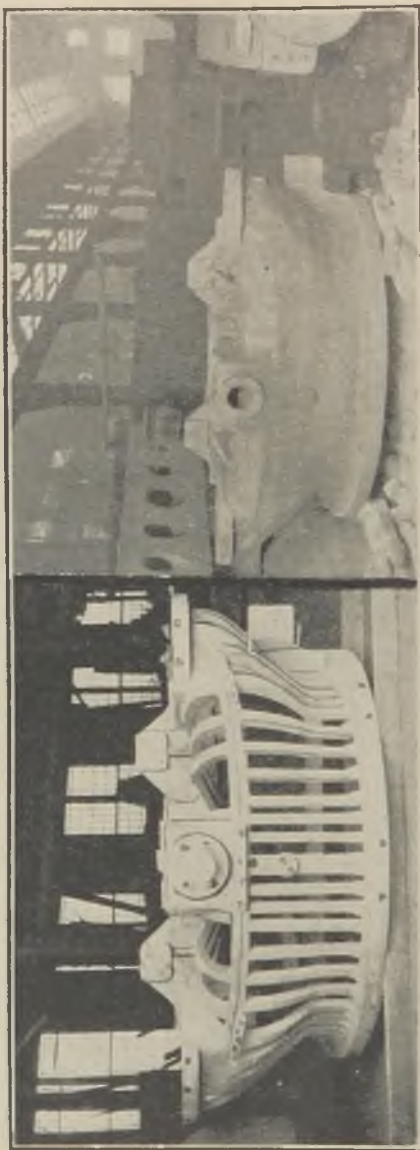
SKELETON PATTERN FOR PART OF TURBINE CYLINDER.
